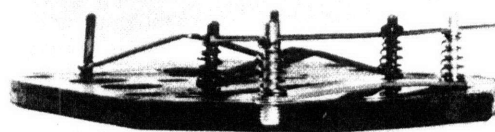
Picture of valve plate with damaged discharge valves, from [29, p. 26-25]. A healthy discharge valve is shown at the front of the valve plate.
